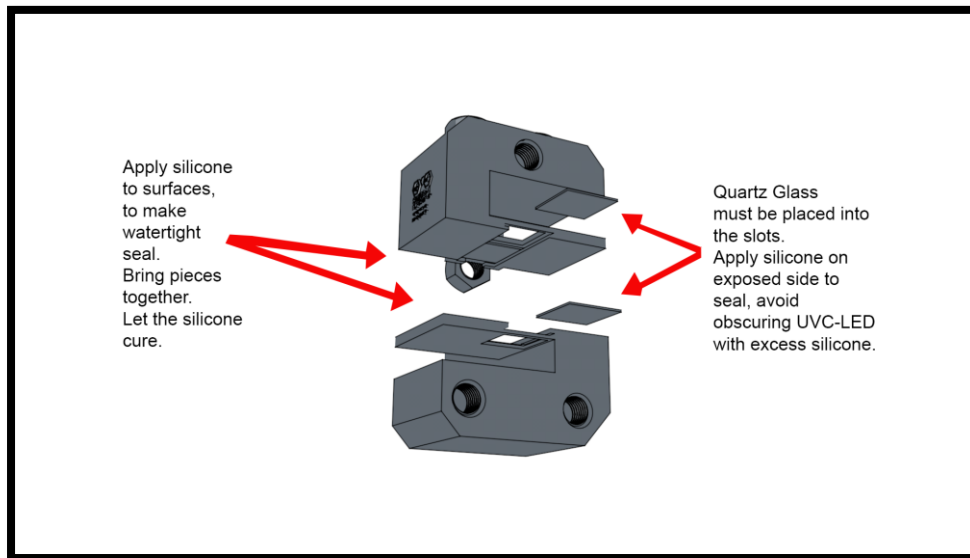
SolDis-1 Reactor 5 assembly and where to apply silicone sealant
